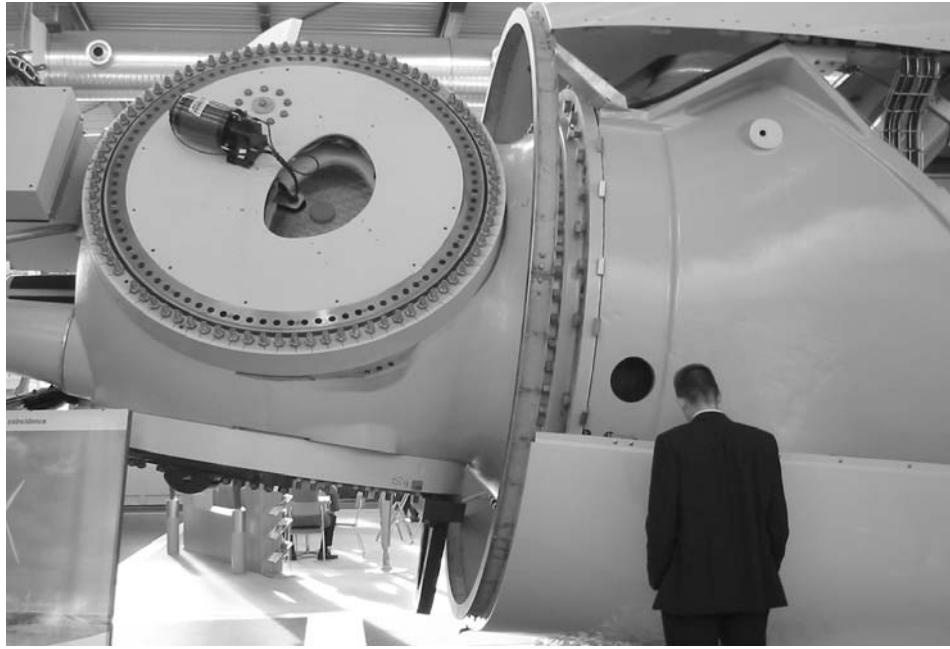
Cast load-bearing structure with in-plane rotor bearing on a VESTAS V90
